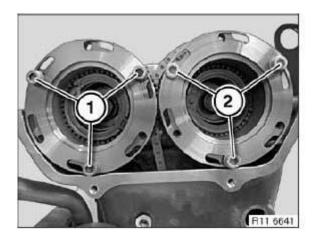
Identifying Hexagon Socket Screws With Washers Courtesy of BMW OF NORTH AMERICA, INC.
